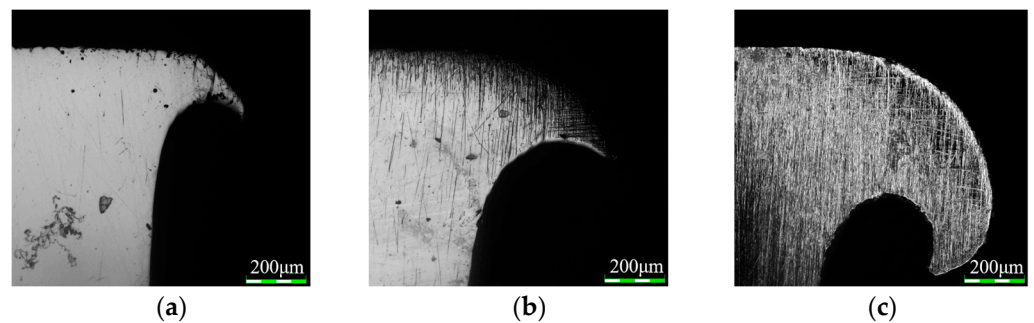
Basic morphology of burr on both sides (a) Type I burr (b) Type II burr, (c) Type III burr.
